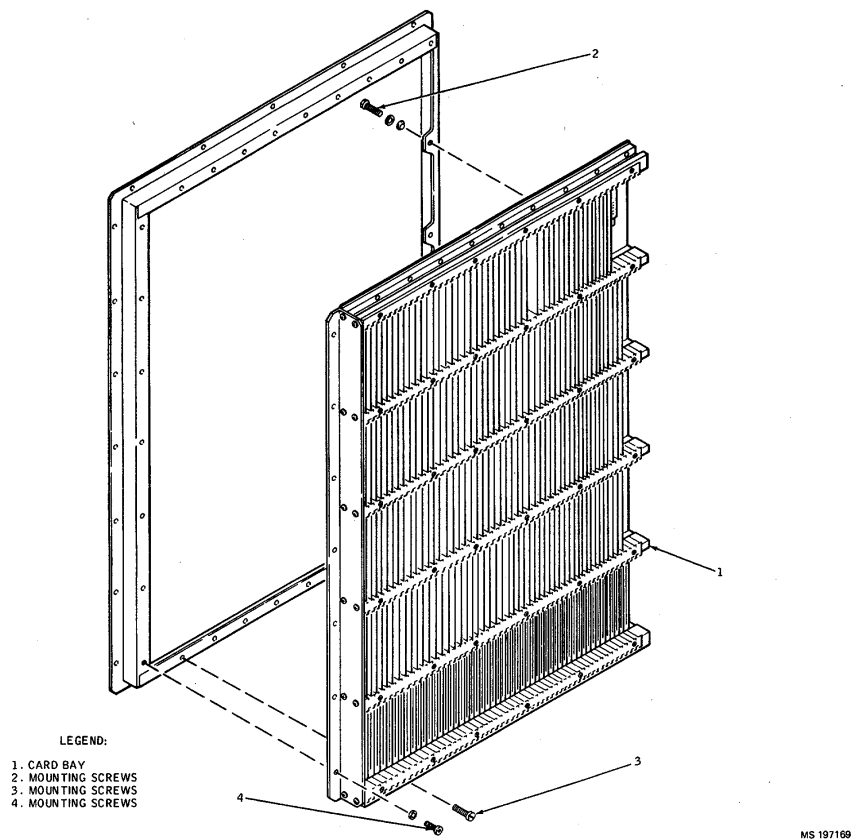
Input/Output Unit 1A1A3A1 and Buffer Unit 1A1A3A2 Card Cage, Removal and Replacement
